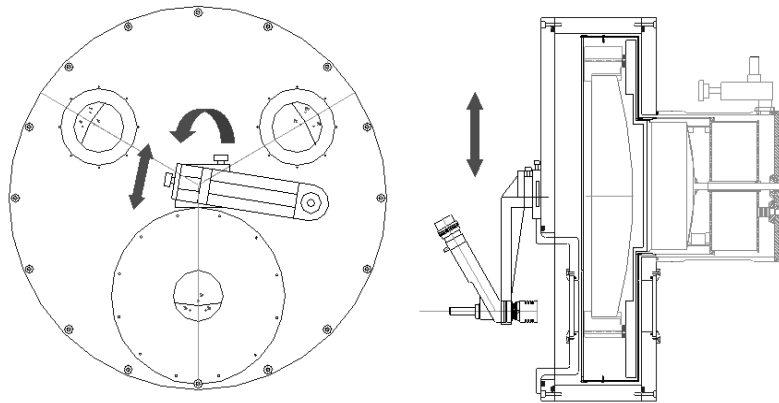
Diagram of measuring device. Test of prototype CO1 in cryostat.
